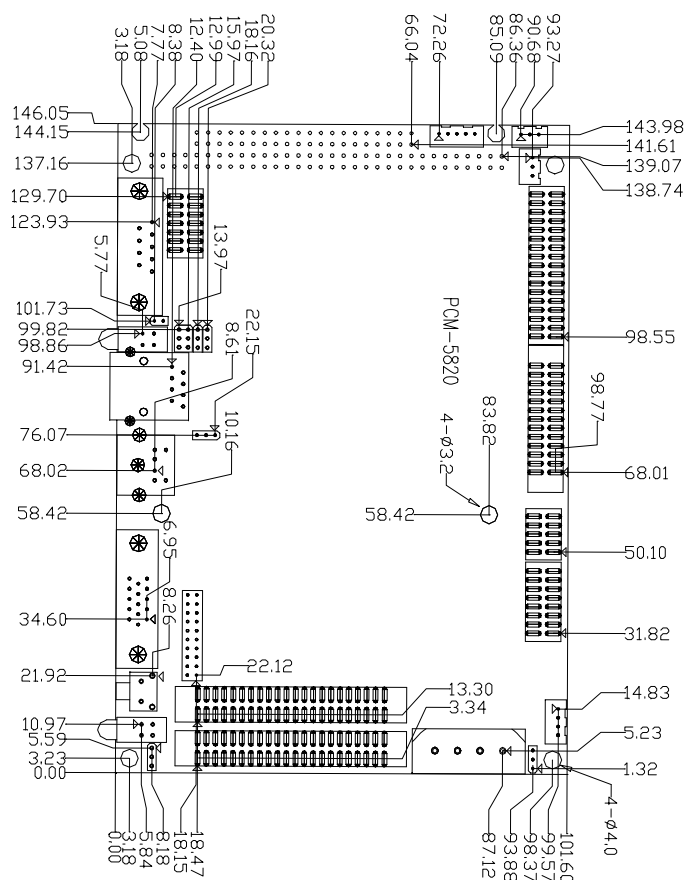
Board Dimensions component side (PCM-5820, PCM-5820L, PCM-5820E only)
